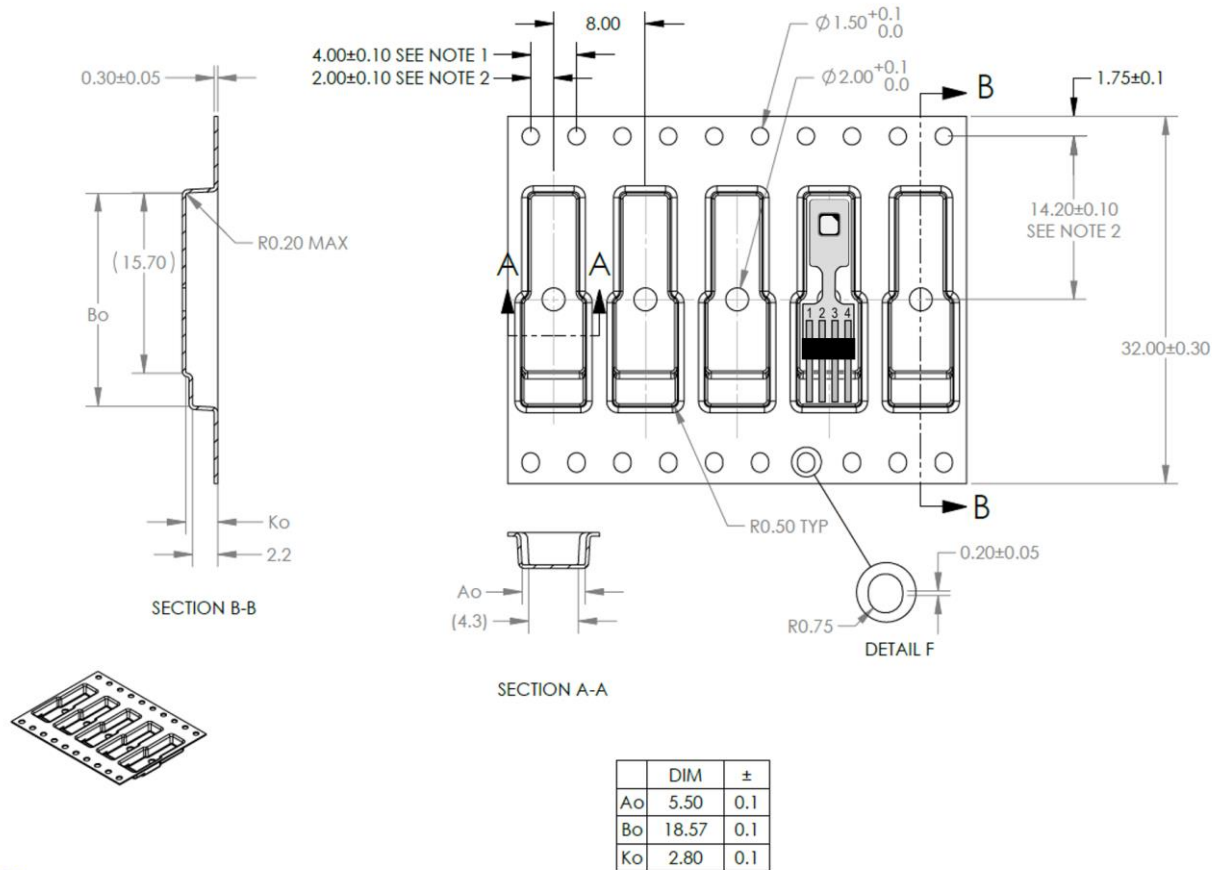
Dimensional drawing of the SHT85 sensor packaging. Dimensions are in mm (1mm = 0.039 inch).
